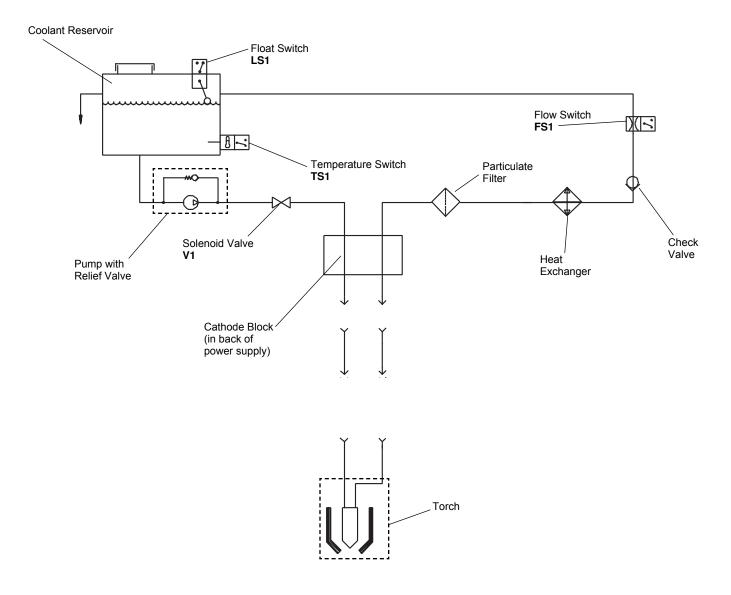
Plumbing Schematic of Power Supply Reservoir Assembly and Torch
